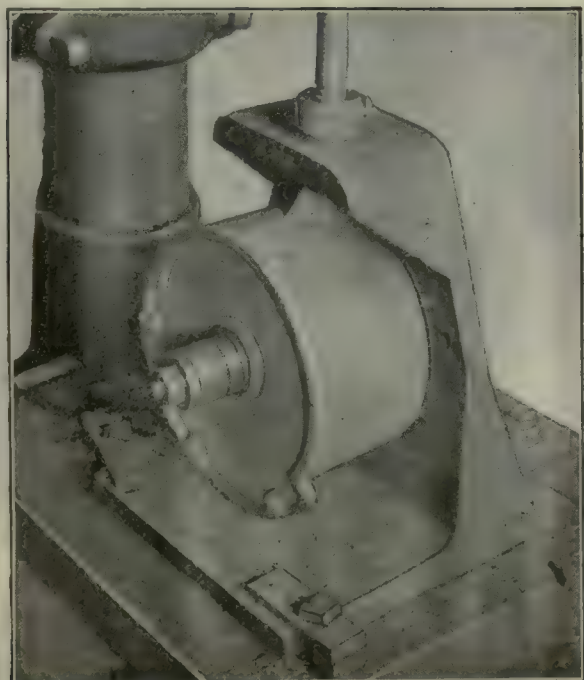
SIMPLE JIG FOR HEAVY CASTINGS
